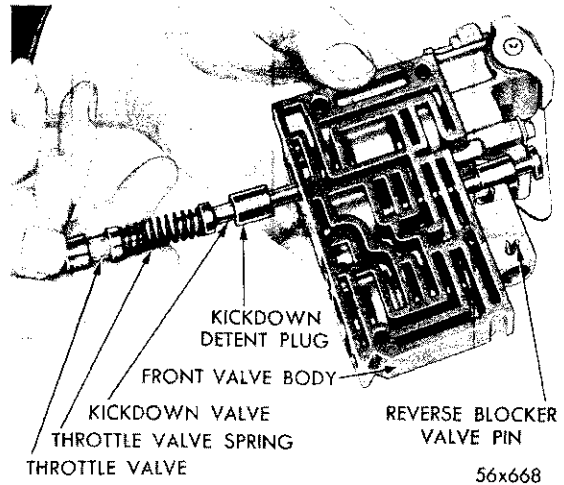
Removal and Installation of Throttle Valve, Spring, Kickdown Valve and Detent Plug
